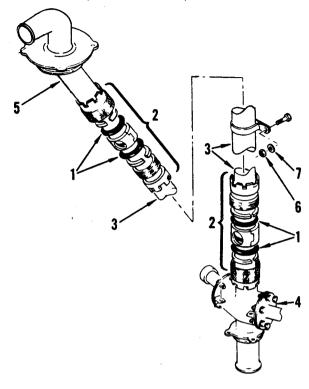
Installation; Aft Fuselage Tank (Sheet 9)
